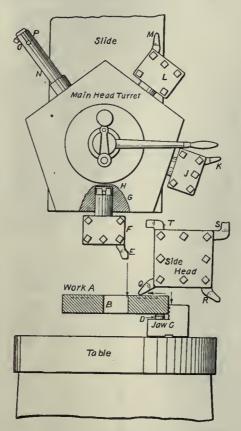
SET UP FOR PLAIN SPUR GEAR BLANK.
